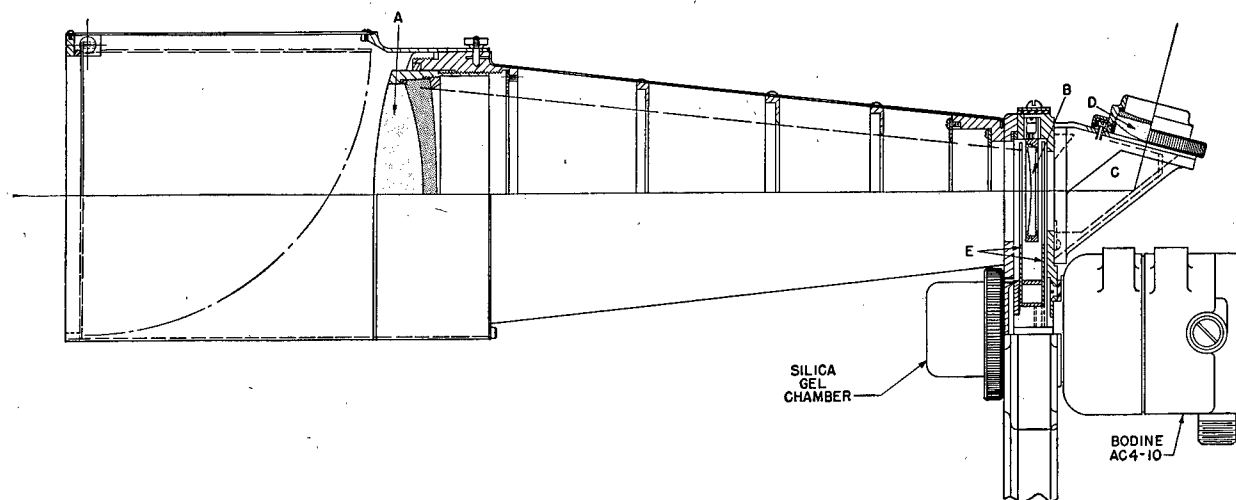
Assembly drawing of Type 1 Icaroscope.
